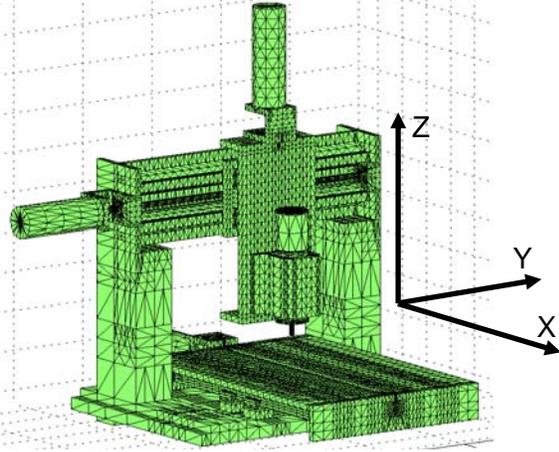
Model of the three axes machine tool with about 5'000 elements.
